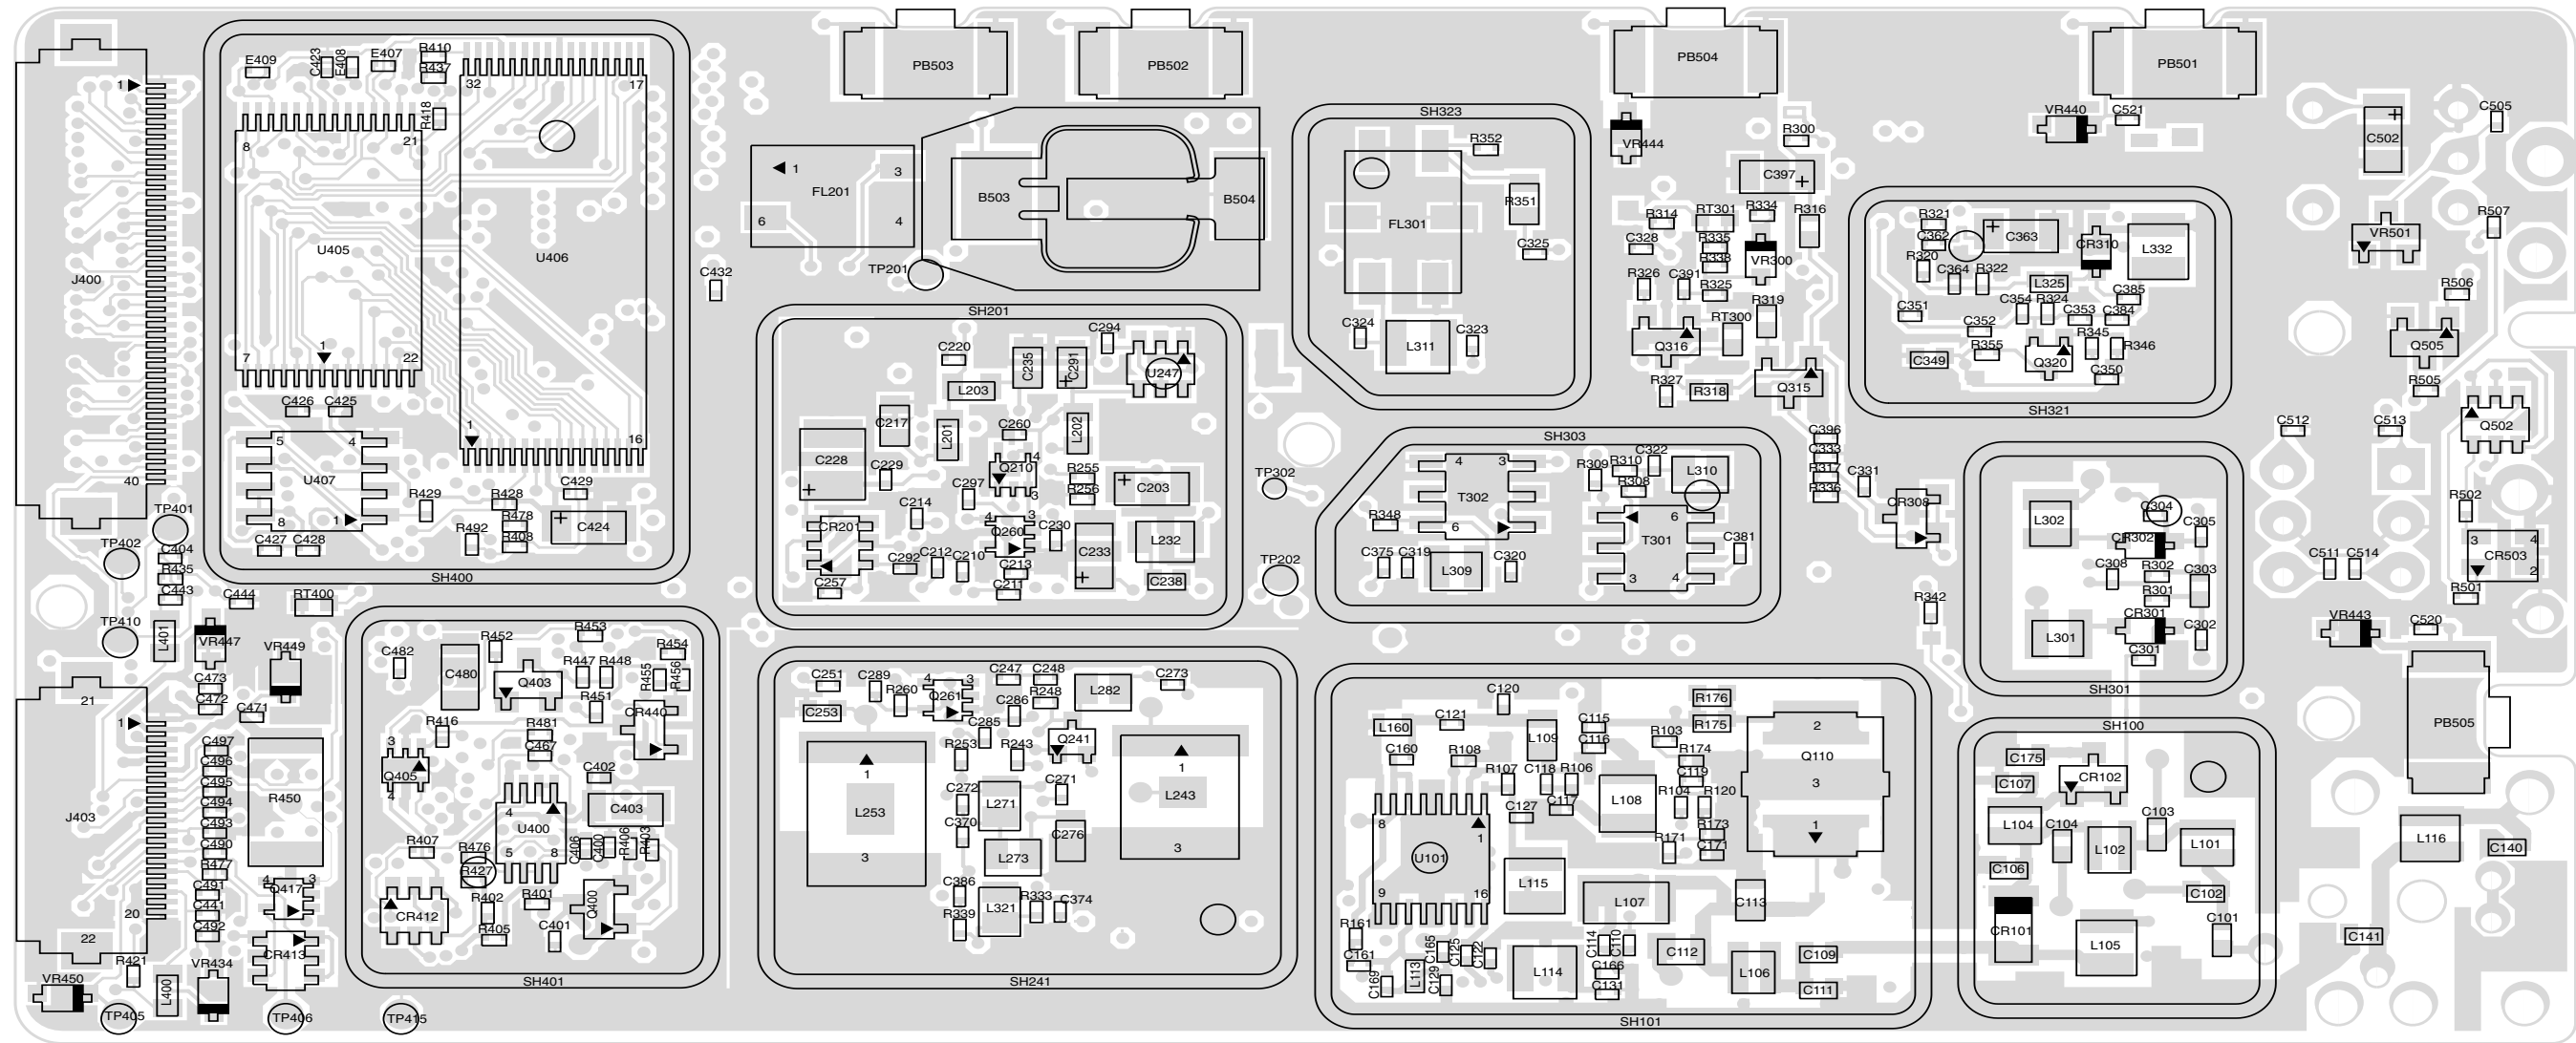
UHF (403-470MHz) 5000/7000 Series Main Board Top Side PCB 8480450Z03
